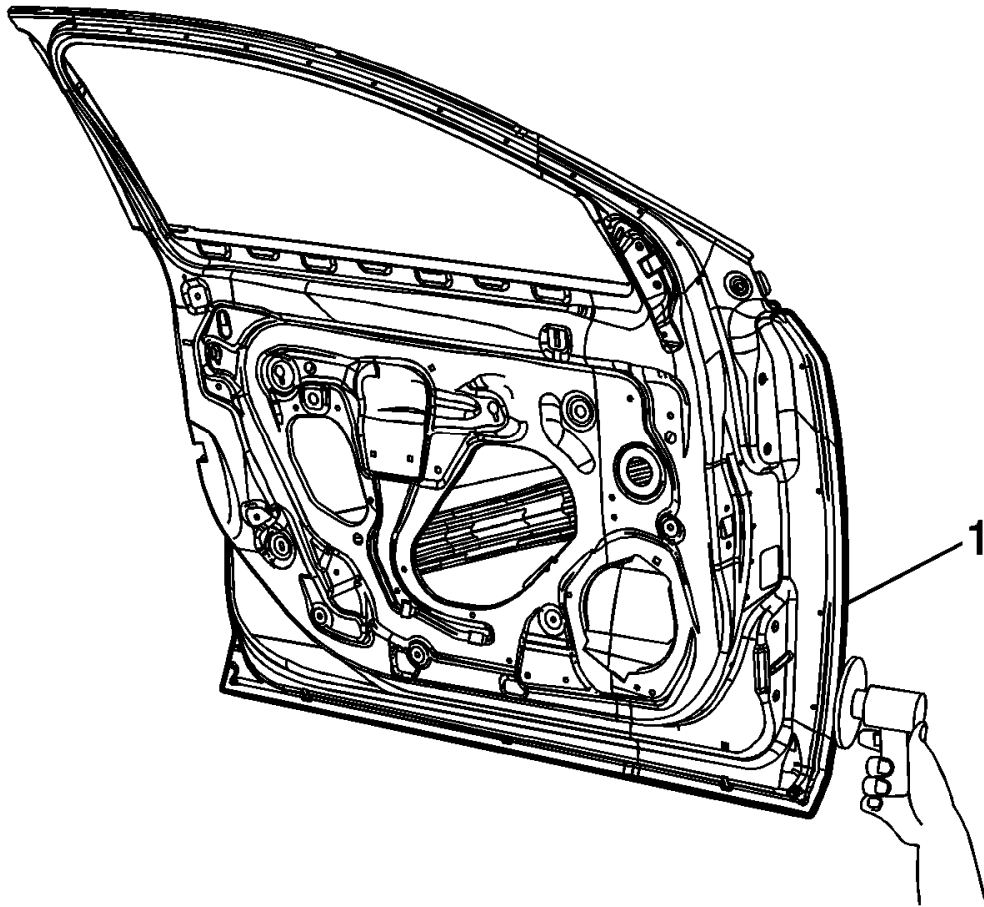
Grinding Front Side Door Outer Panel Mating Flanges
